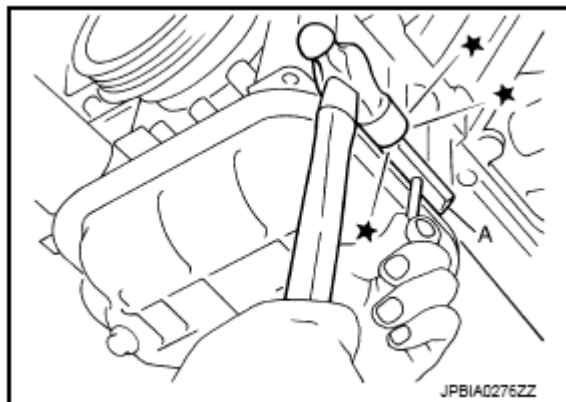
Inserting Seal Cutter Between Oil Pan (Upper) And Oil Pan (Lower)
